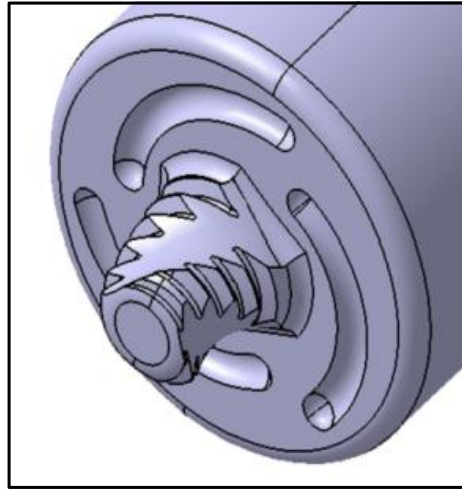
Pin tool configuration with right-hand threads and right-hand twisted flats.
